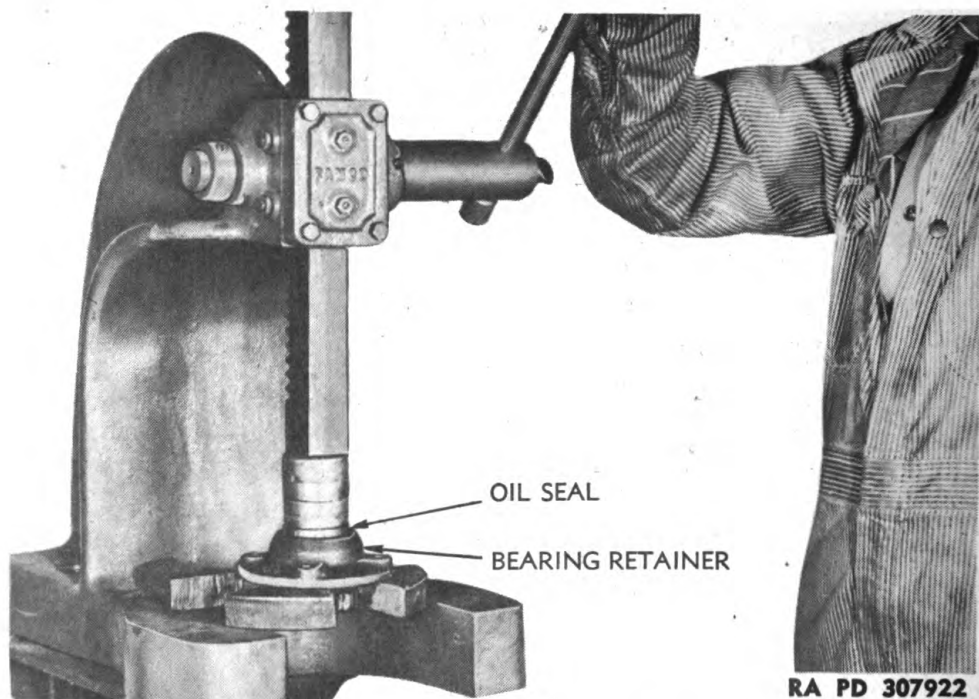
Pressing Oil Seal Into Bearing Retainer
